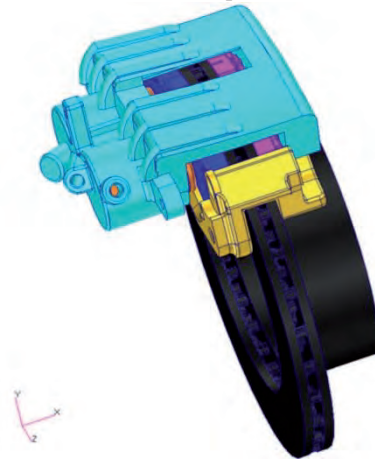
CAD model of brake system with dual-piston clamping system [5]
